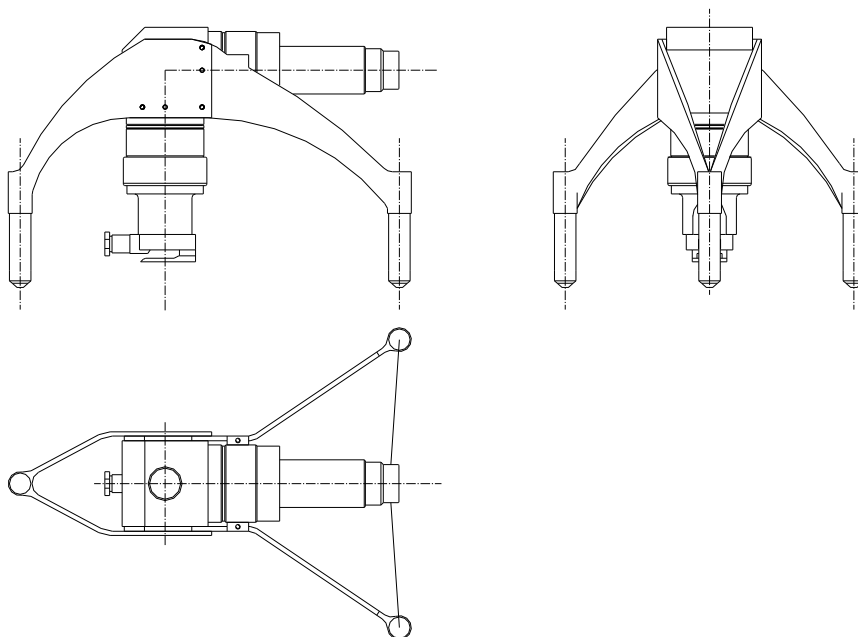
External view of a layout of a welding tool with support on three ball bearings that allows for its installation in a position, perpendicular to that of the workpiece.
